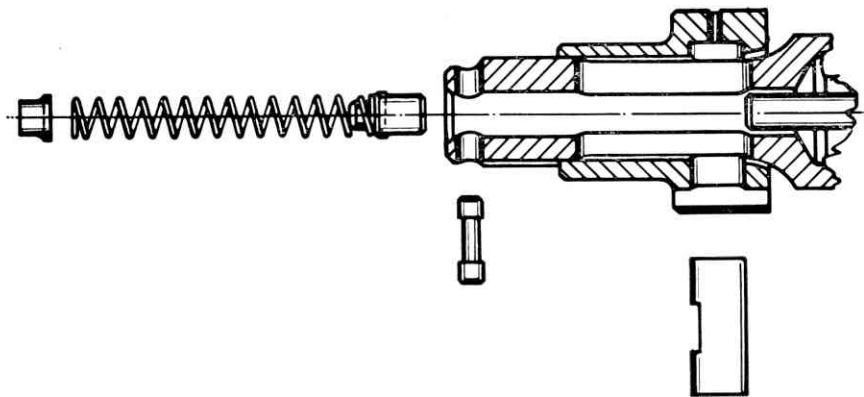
EXPLODED VIEW OF THE STARTER MOTOR PINION
